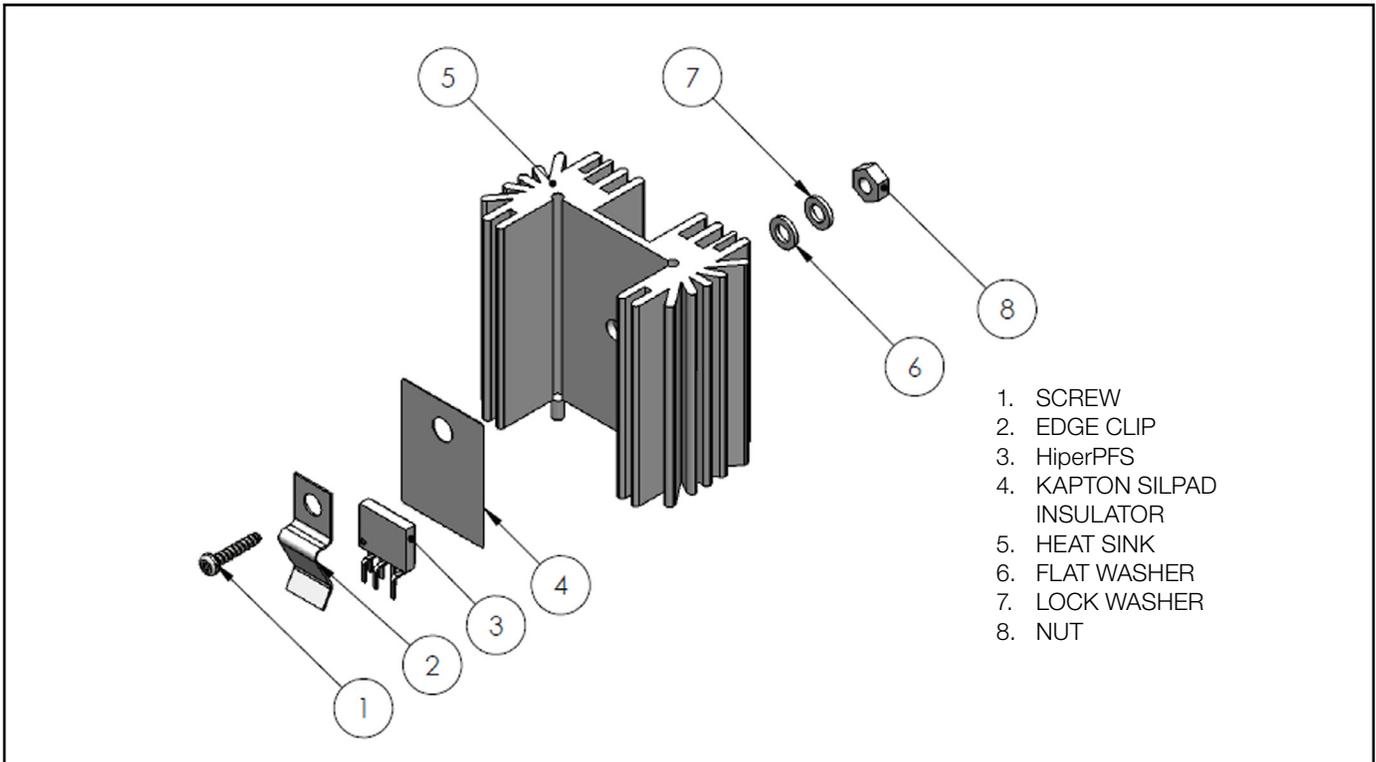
Heat Sink Assembly Example – Low Power Designs (< 150 W (Universal Input) and < 300 W (230 V Input)).
